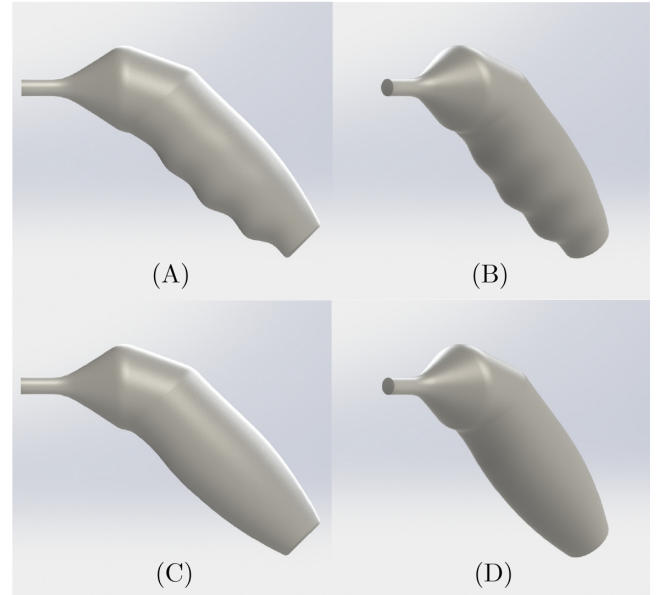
Various handle designs. A-B) 3D drawing of the handle design with finger grooves. C-D) 3D drawing of the handle design without finger grooves.
